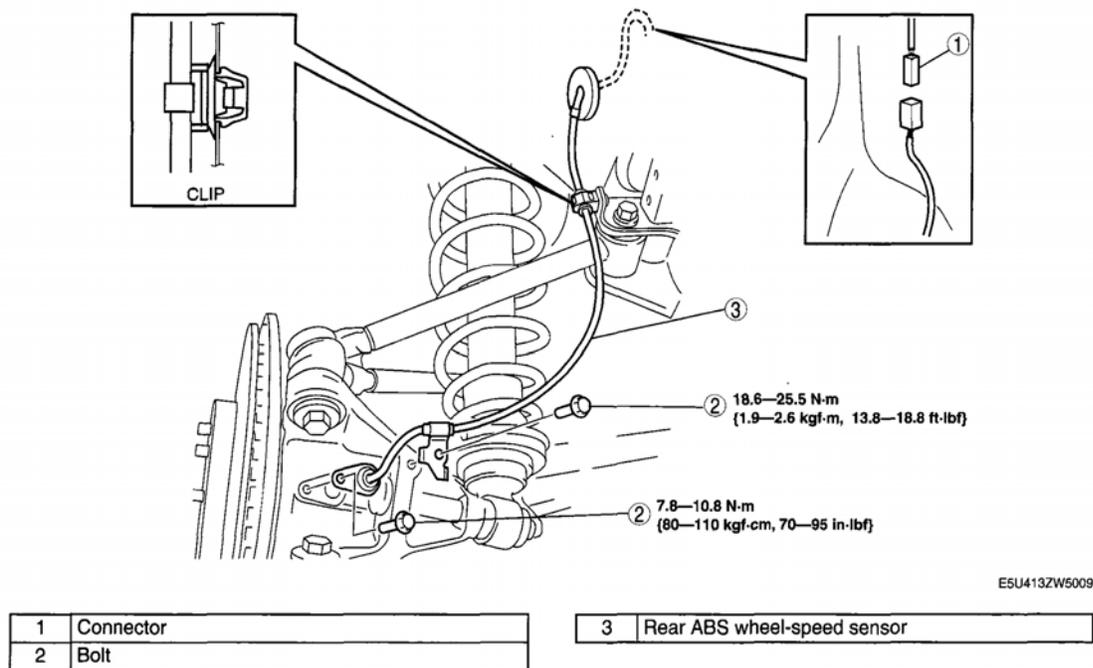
Identifying Rear ABS Wheel-Speed Sensor (With Torque Specifications)
